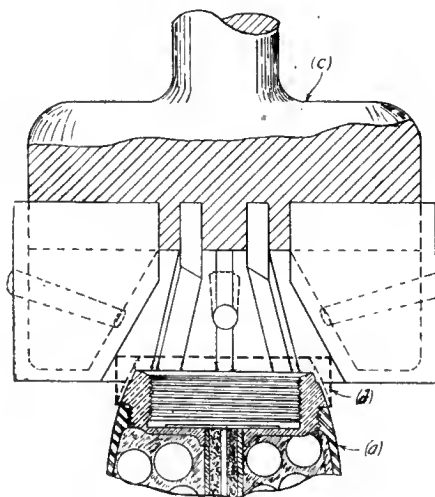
HOLLOW MILL FOR SOCKET TIGHTENING MACHINE.
